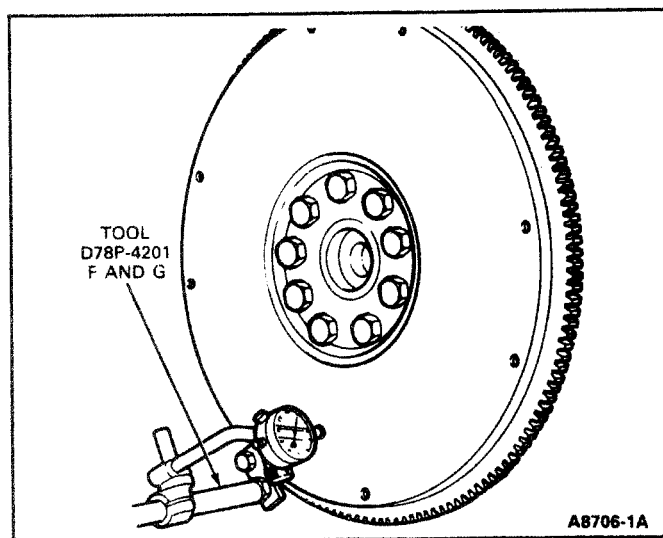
Checking Flywheel Face Runout—Manual Transmission
